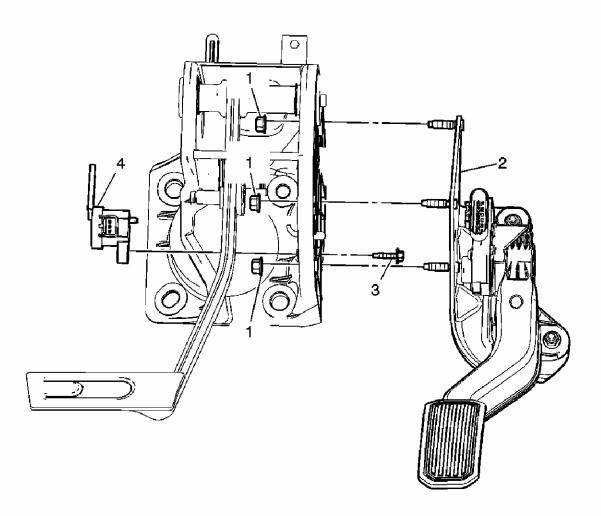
Identifying Brake Pedal Position Sensor Courtesy of GENERAL MOTORS CORP.
